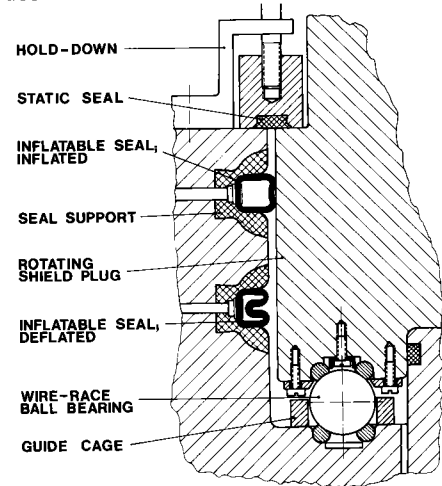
DETAIL OF ROTATING SHIELD PLUG
